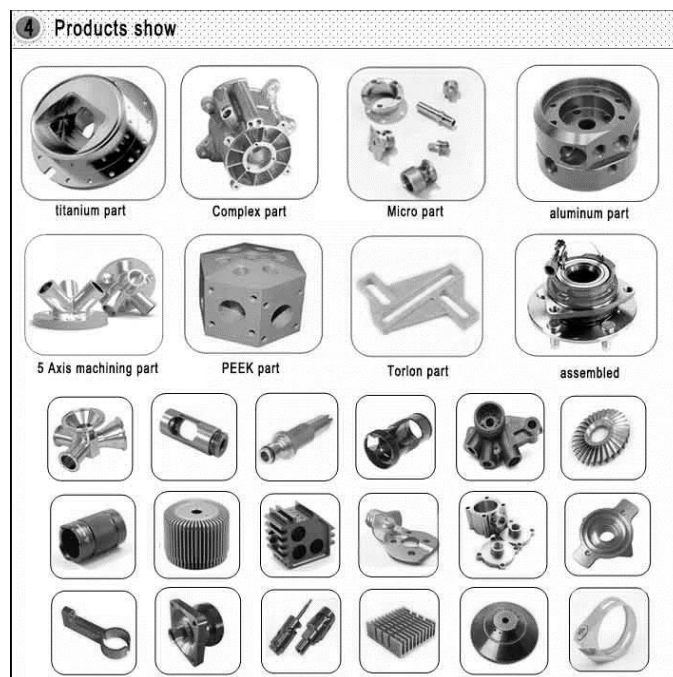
The examples of the use of titanium carbide in mechanical engineering
